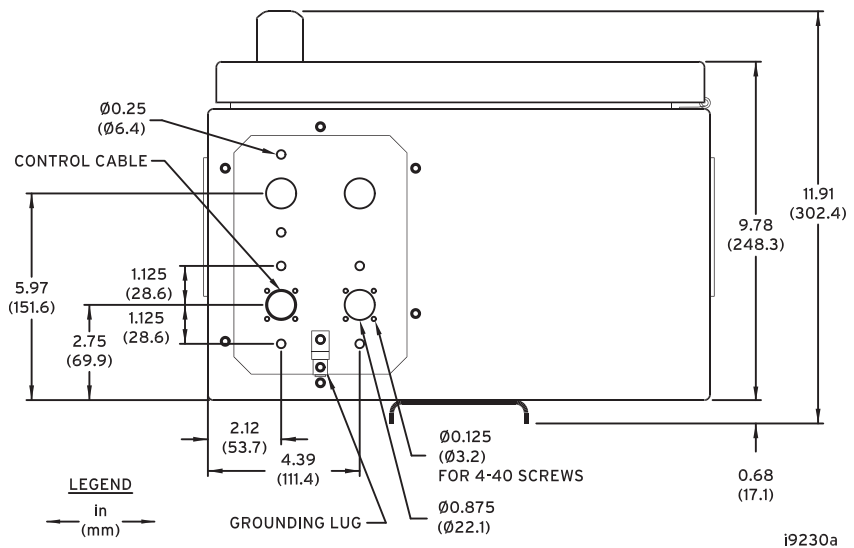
Connector Panel at Bottom of Enclosure (Swing Open Enclosure)
